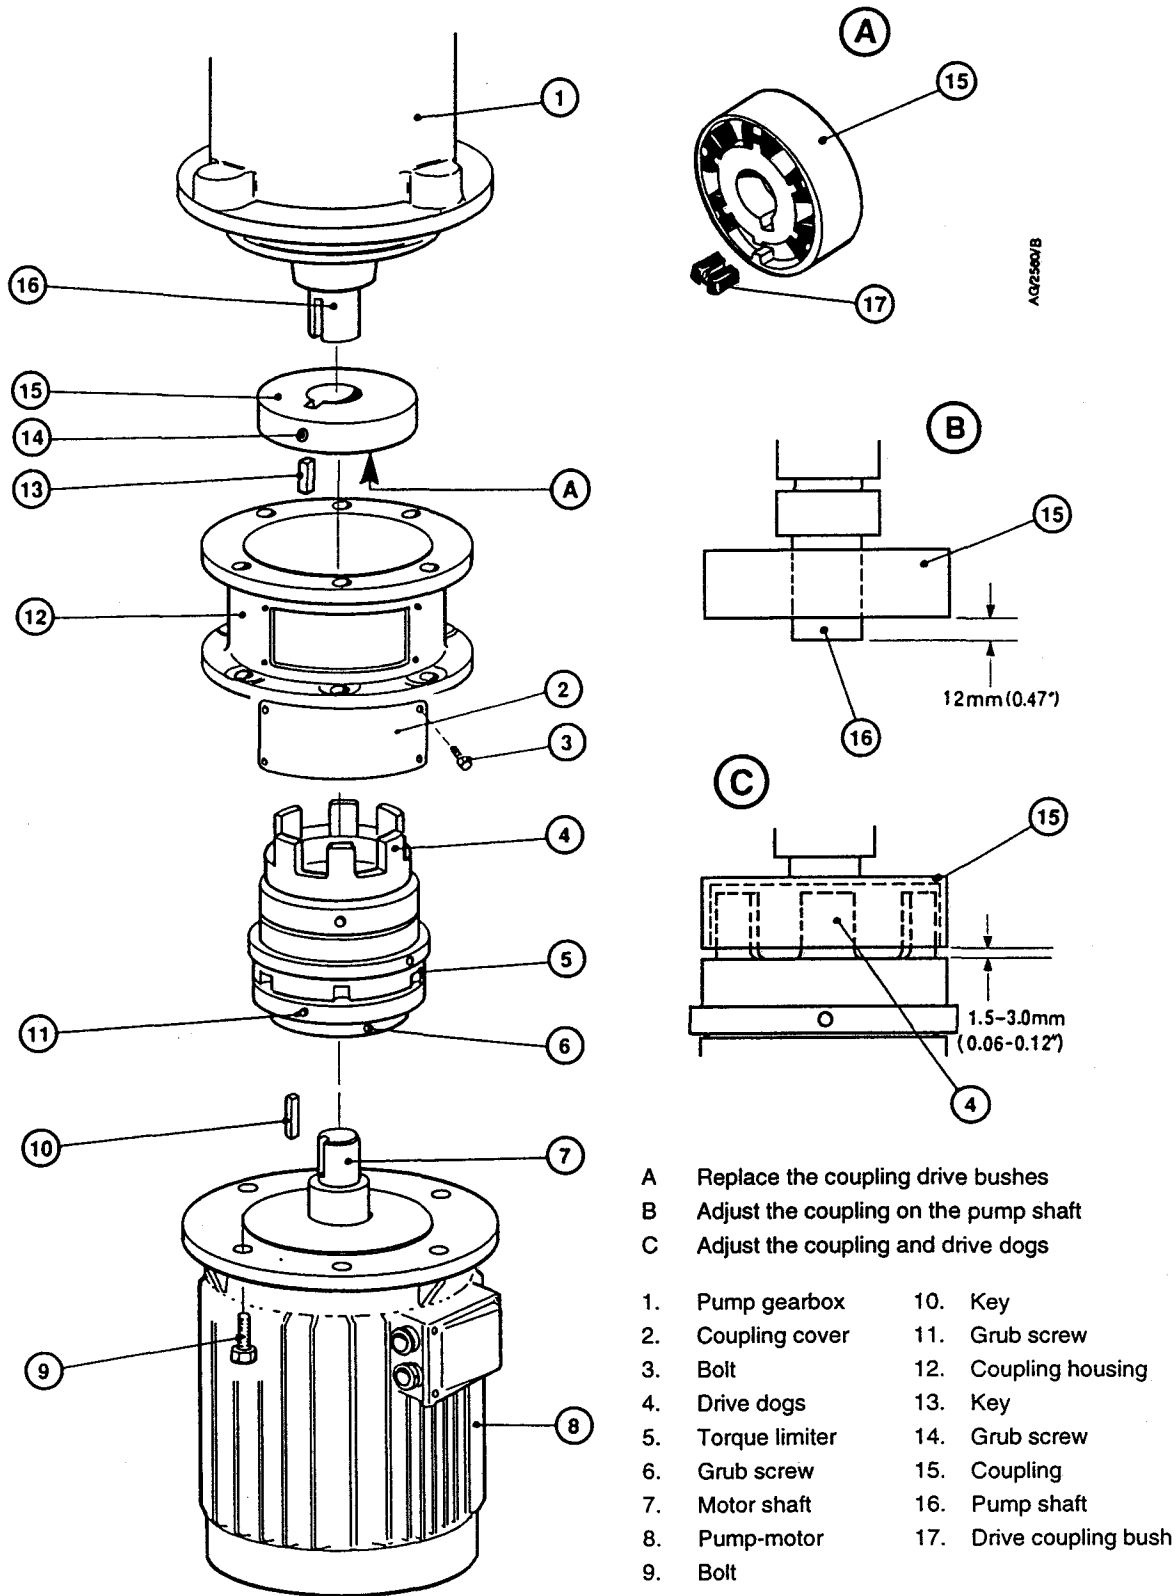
Exploded view of the pump-motor, torque limiter and coupling housing
